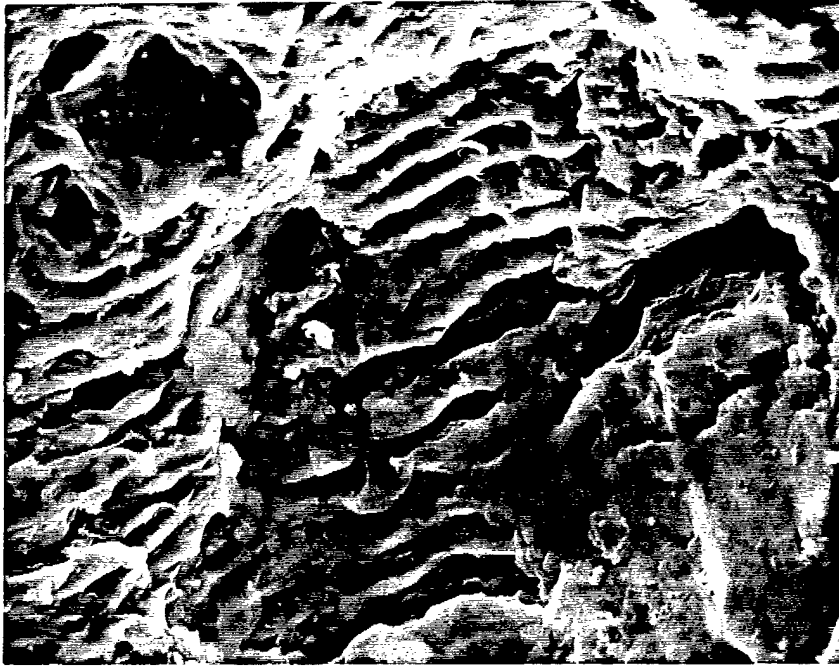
Striations Noted on the Fracture Surface of PUR Rod -177 (Mag. 3kx).
